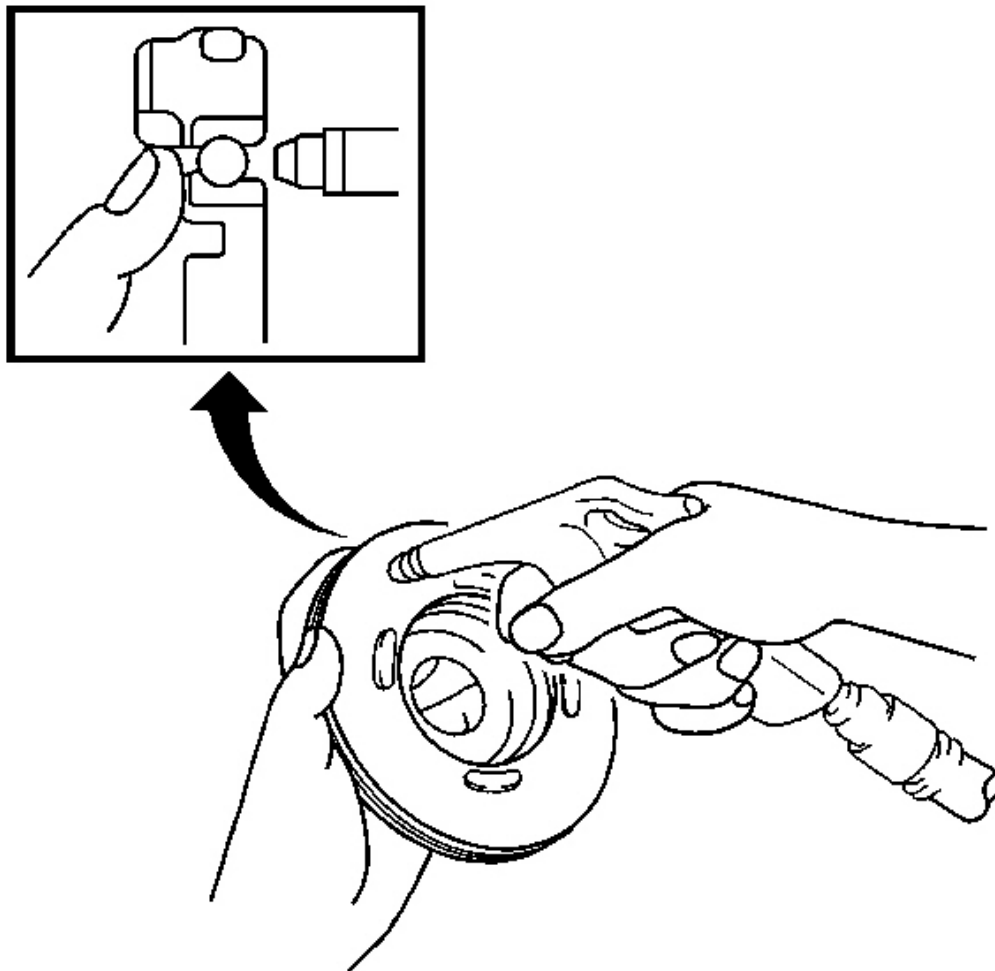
Applying Low-Pressure Compressed Air To Direct Clutch Piston
